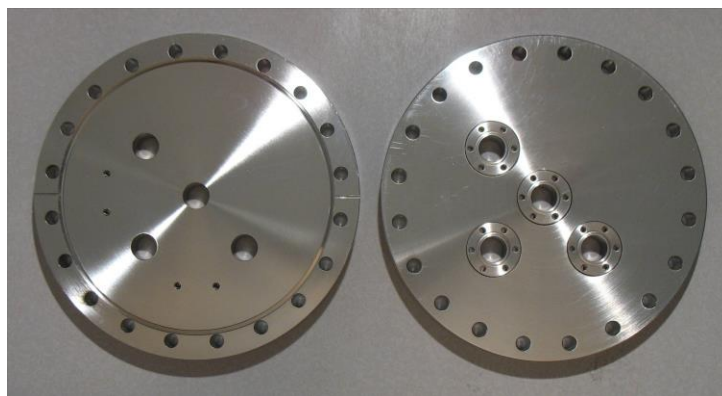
Custom 8" flanges: Left-interior face. Right-exterior face.
